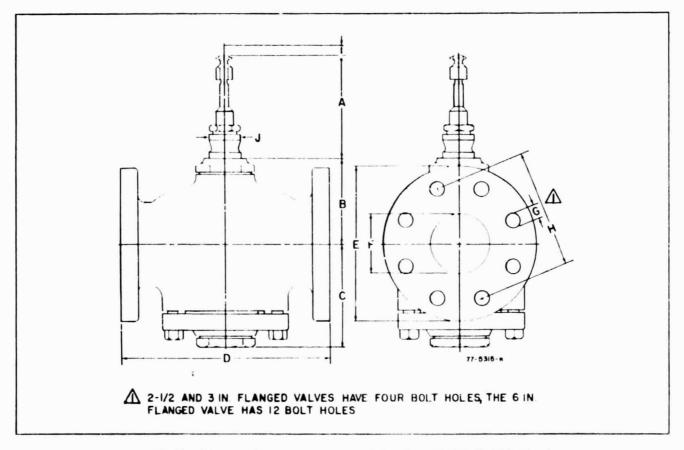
V5011B & E FLANGED BODY DIMENSIONS (REFER TO TABLES 5 AND 6)
